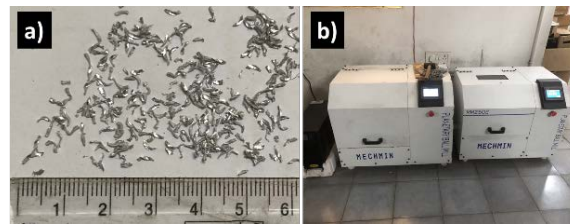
a) Raw AA5083 chips, b) MECHMIN Planetary ball mill.
